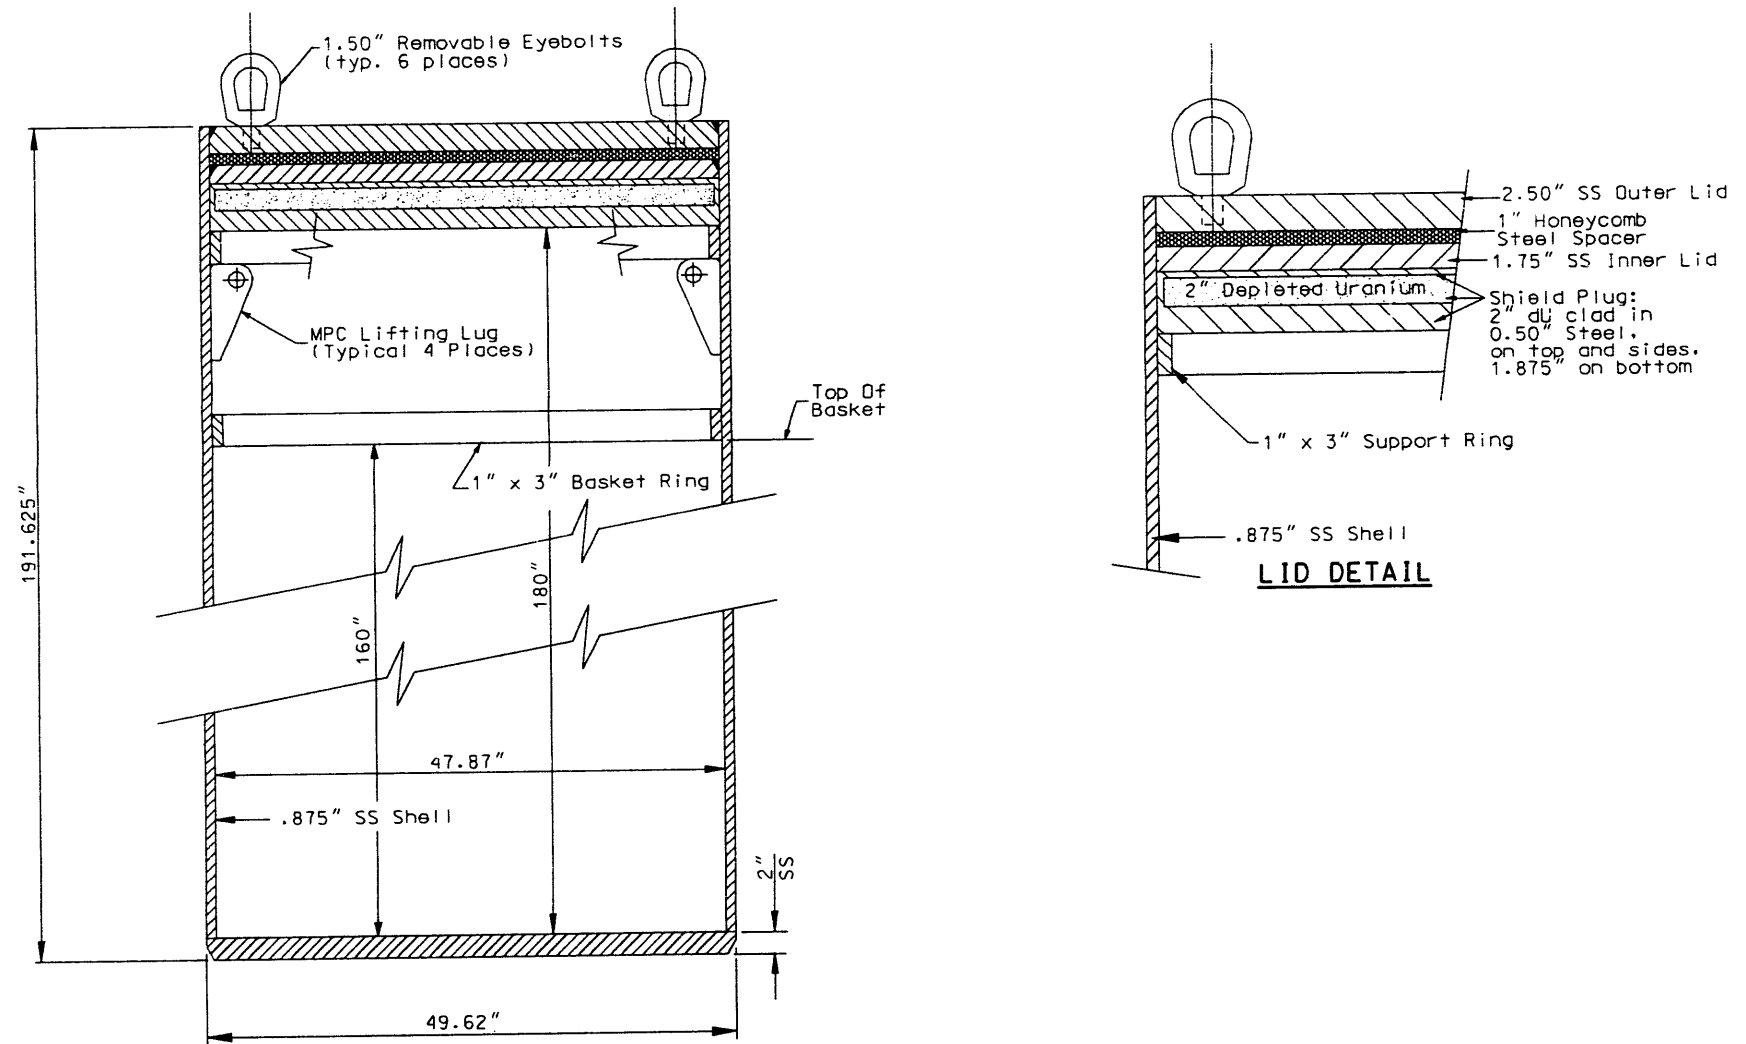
90-Ton MPU Inner Canister (Side Section View)
